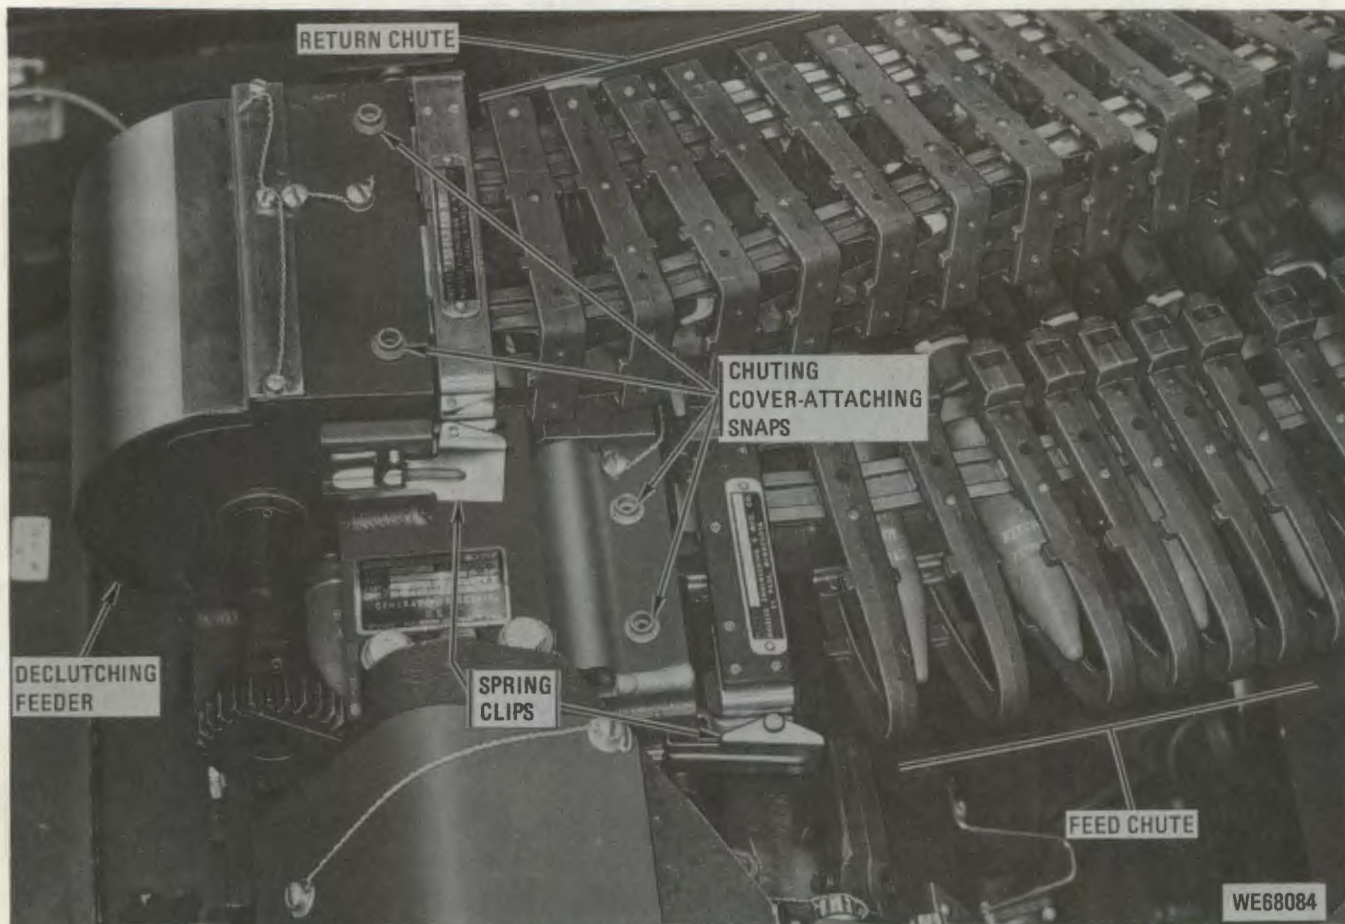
Chuting attachment details, declutching feeder end (chuting covers removed).
